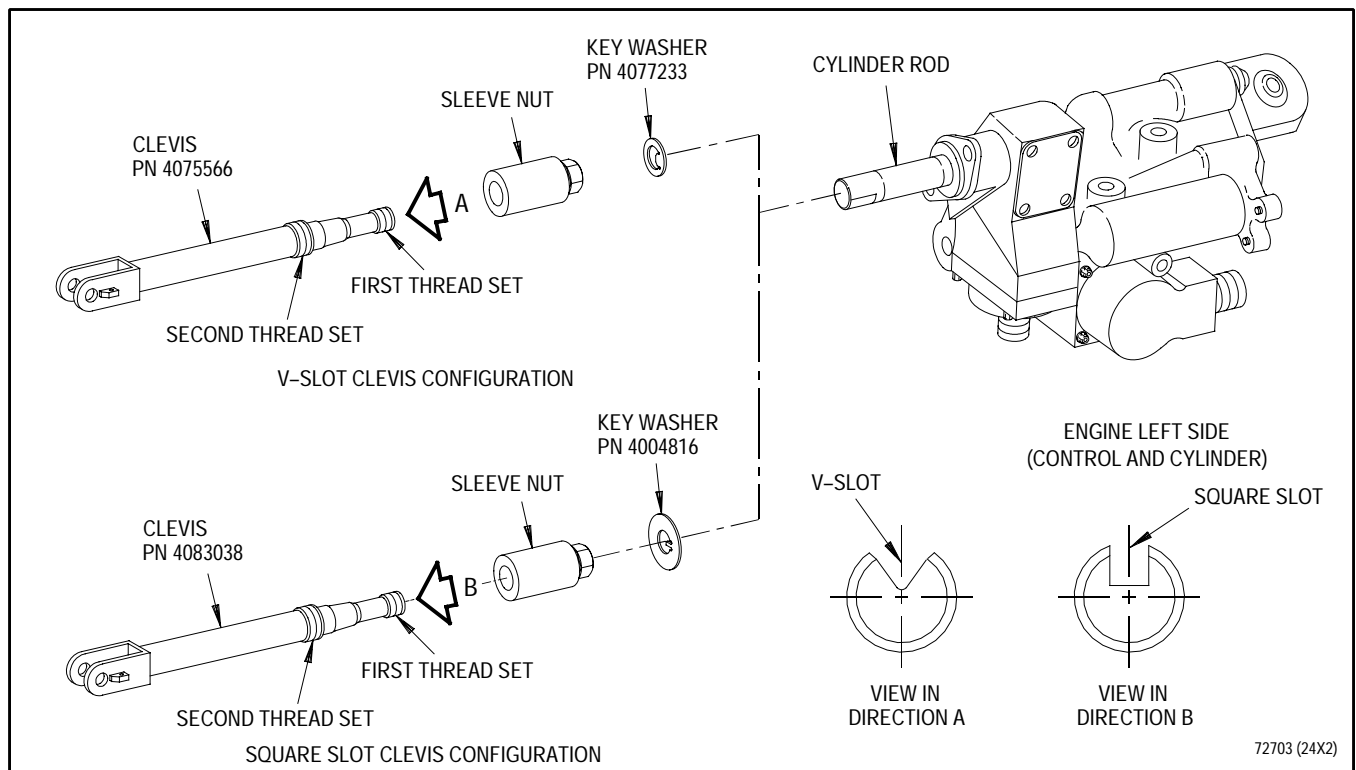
Compressor Inlet Variable Vane Control and Cylinder Attaching Parts - Installation
